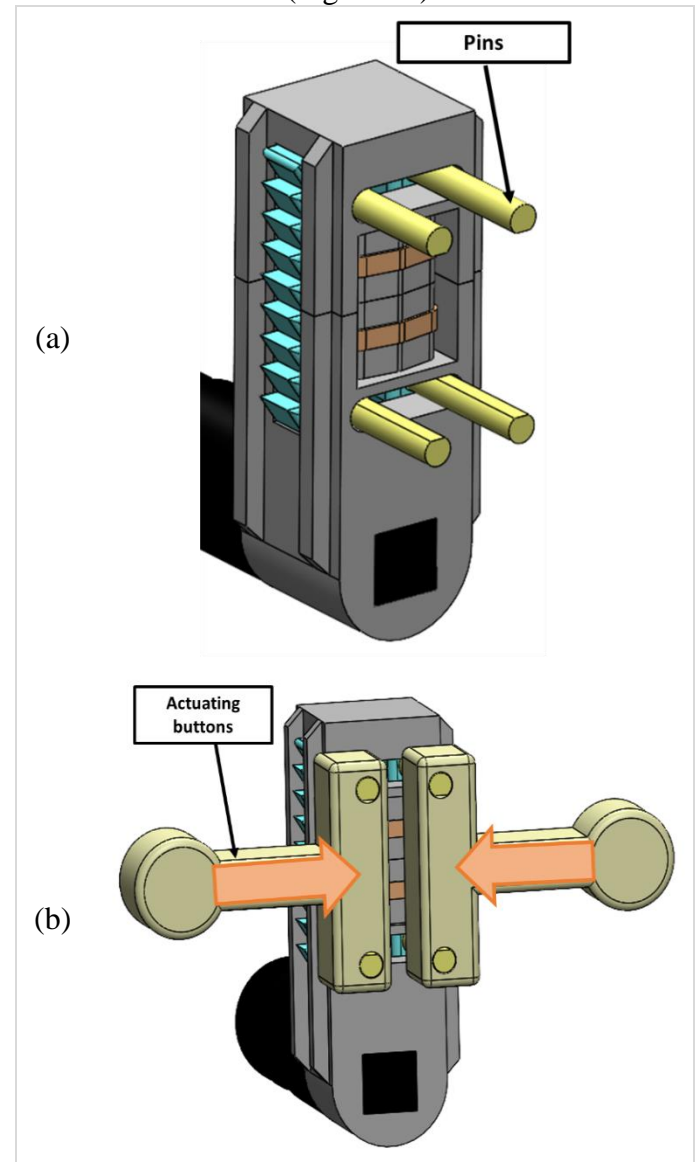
Inner Part of the Mechanism with Pins (a), and with Pins and Button (b)
